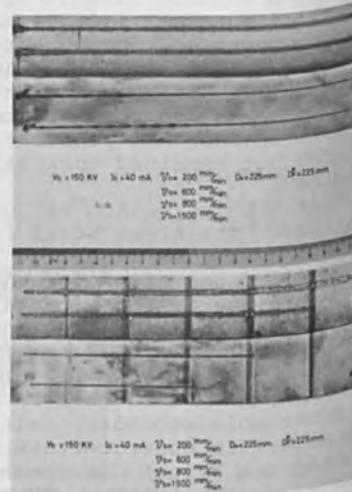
Surface and reverse bead profile for various welding speeds.
